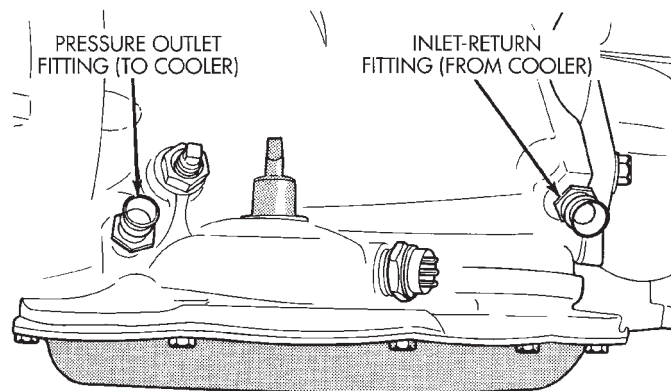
Cooler Line Fitting Identification (30RH/32RH)
